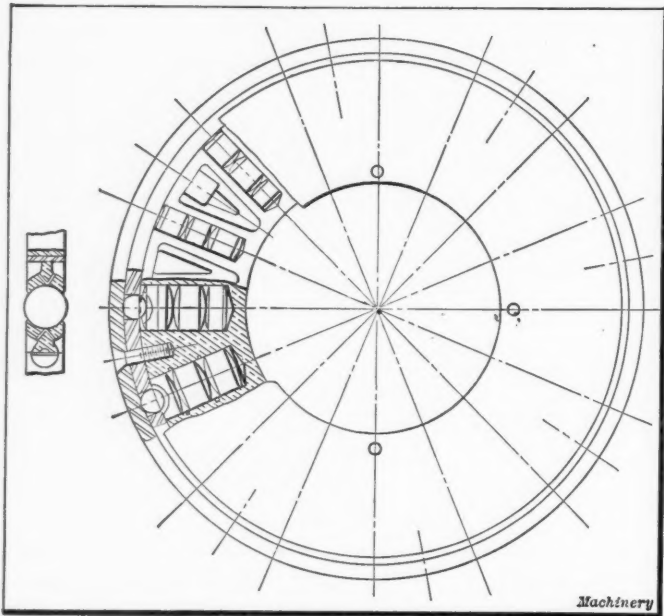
Means for Taking Care of End Thrust of Rollers in Roller Thrust Bearings
